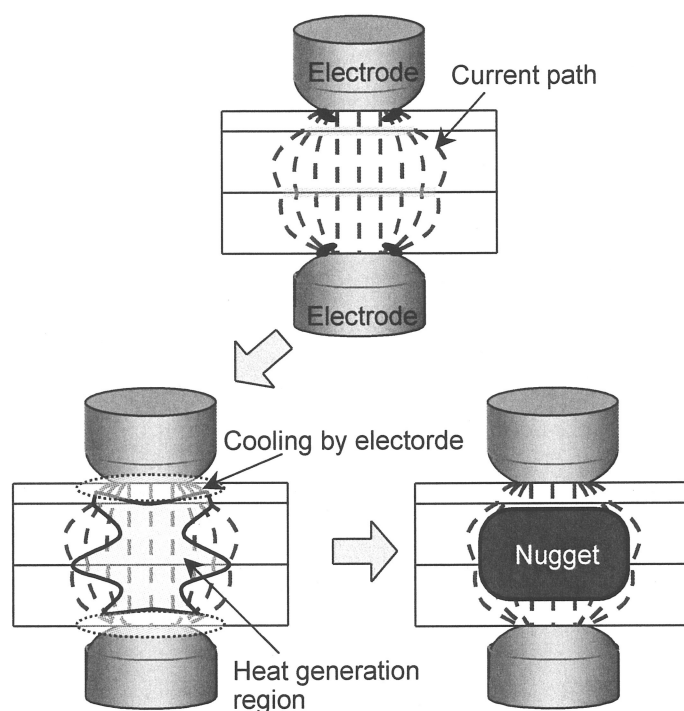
Schematic diagram of process of nugget formation in resistance spot welding of three sheet joint.
